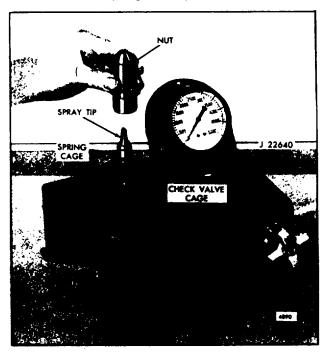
Installing Injector Valve Parts on Auxiliary
